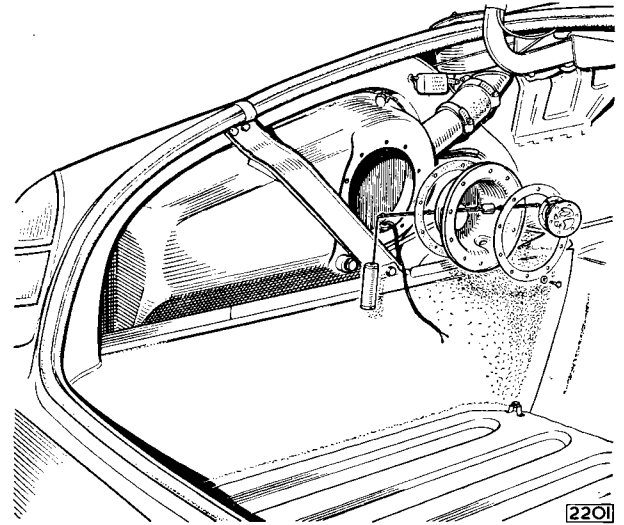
Showing the cover plate and fuel tank gauge unit removed
